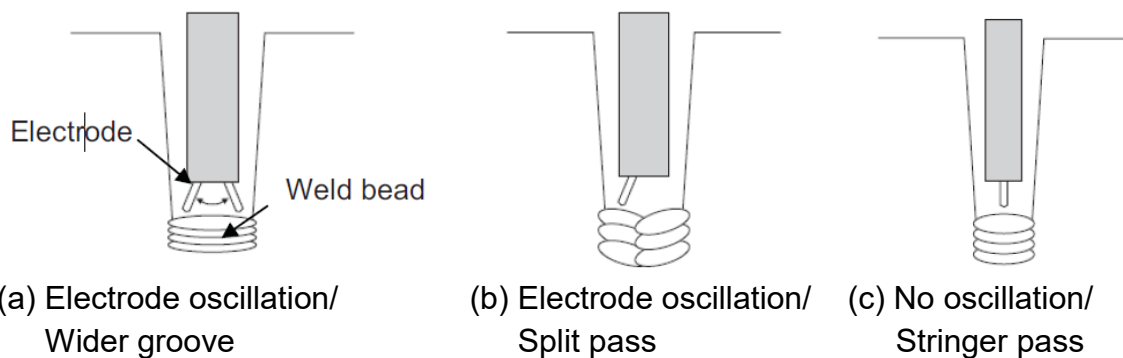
Handle modes of welding electrode and weld pass in NG-GTAW [57].
